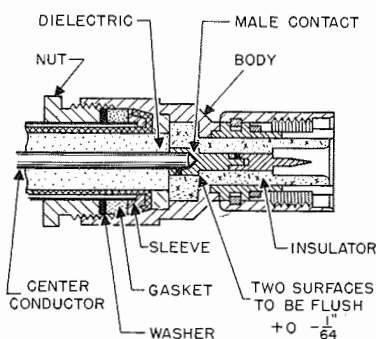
R-F Cable Assembly CG-597/U, Fabrication
